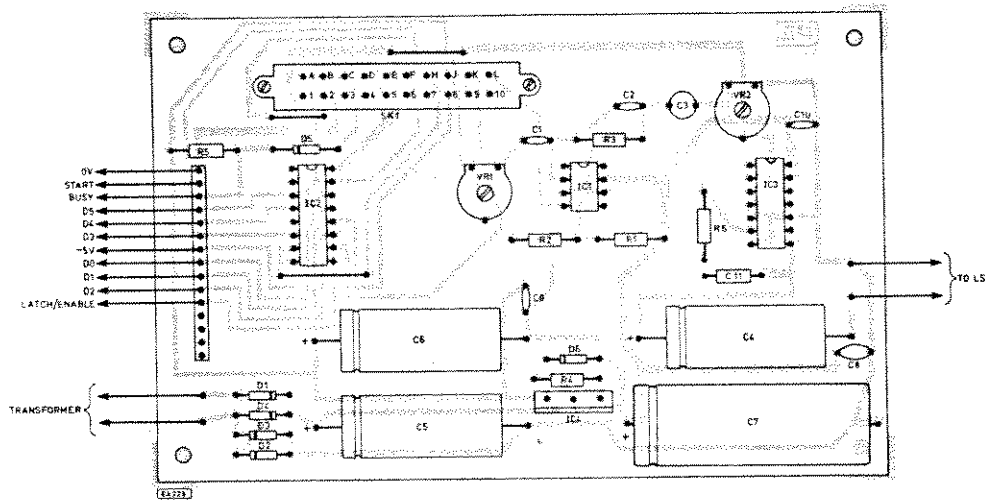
P.c.b. design and component layout for the interface board (Copyright Modus Systems Ltd)
